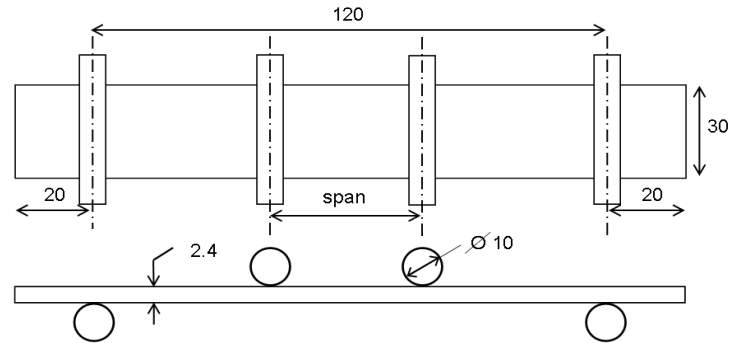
Dimensions of the used four-point bending coupon in millimetres.
